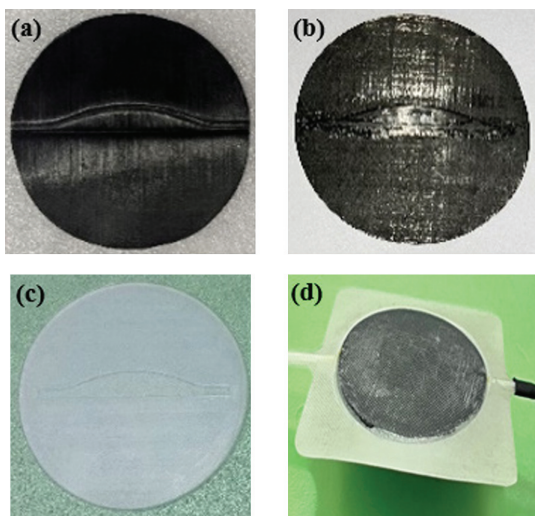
Fabricated sections. (a) Lower substrate. (b) Hot-pressed sensing module. (c) Flexible pad. (d) Finished FBG-CSS sample.
